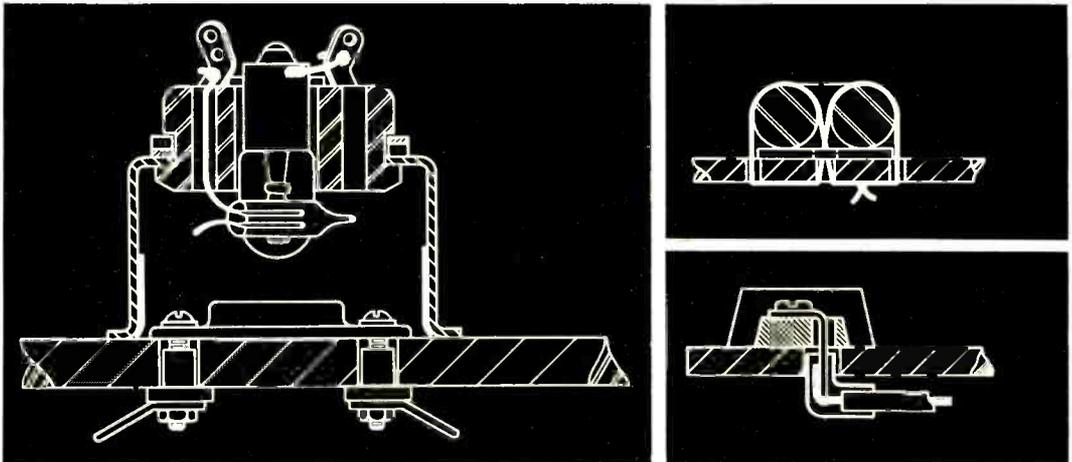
Modify octal socket by drilling out center to $\frac{13}{32}$ "; remove odd pins 1, 3, 5, and 7, and wire as shown. The photocell must be centered under shield assembly; mounting hardware comes with cell.
